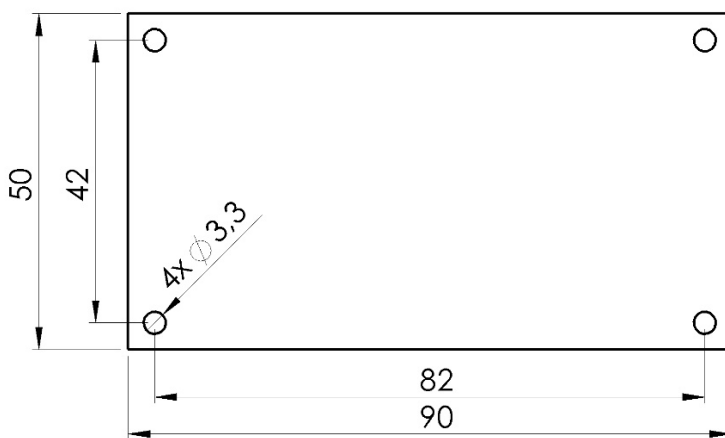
PMT u-CSA & SA EVM board dimensions.
